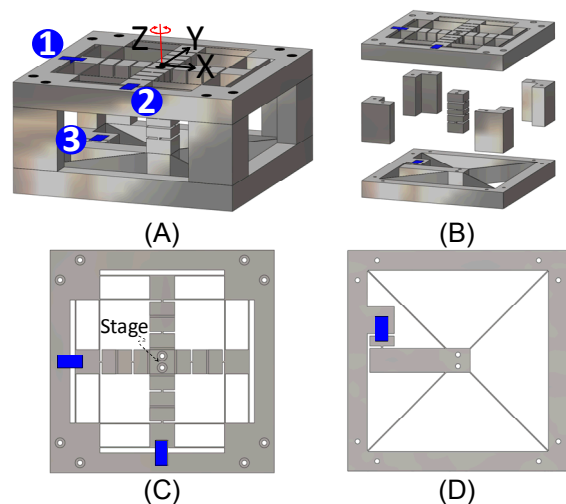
Another design (A) with exploded view (B), top piece (C), and bottom piece (D)
